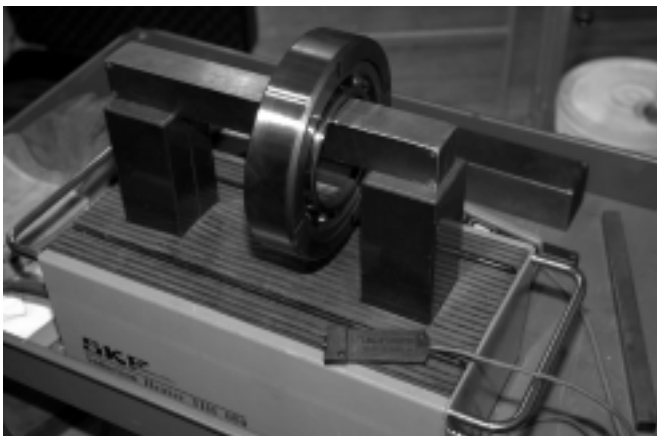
After heating the bearing, slide the first half onto the shaft as shown.
